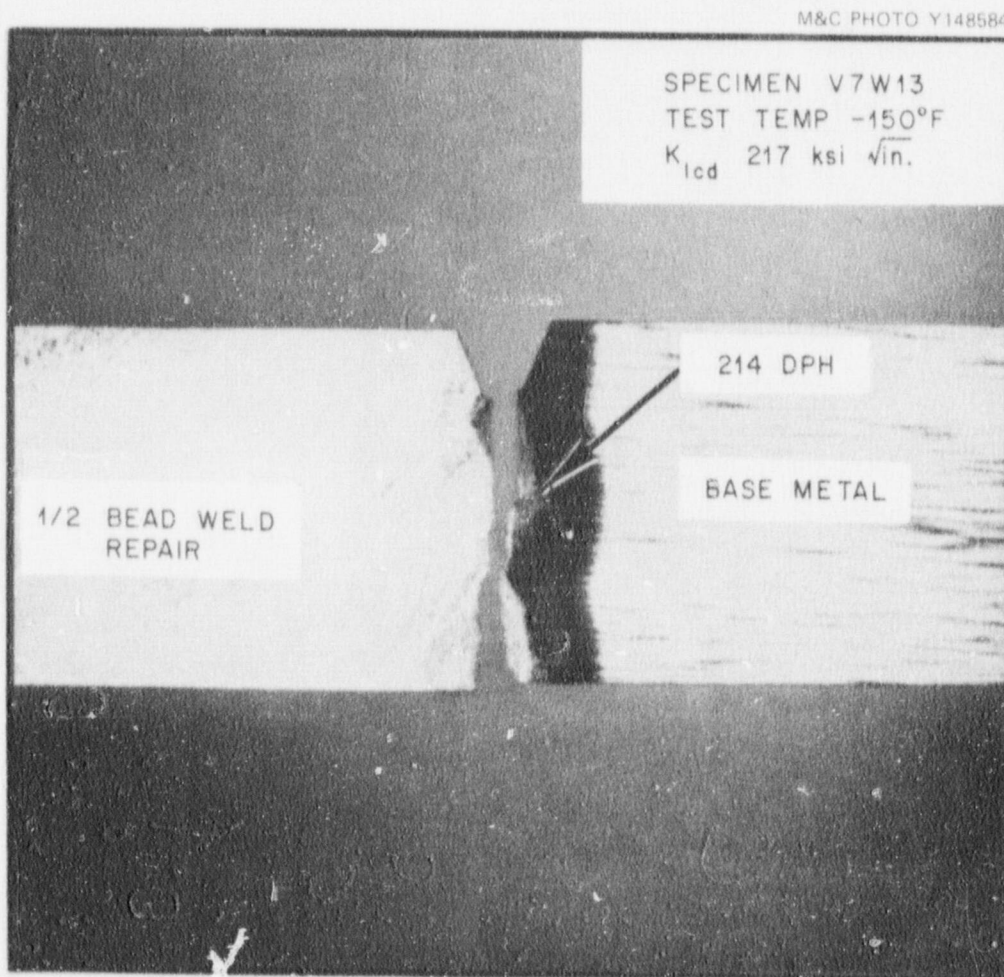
Specimen with crack tip in the weld metal.
